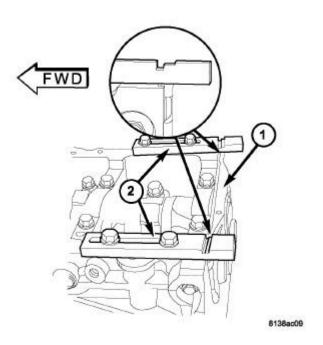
Rear Crankshaft Seal Retainer Alignment Courtesy of CHRYSLER LLC
